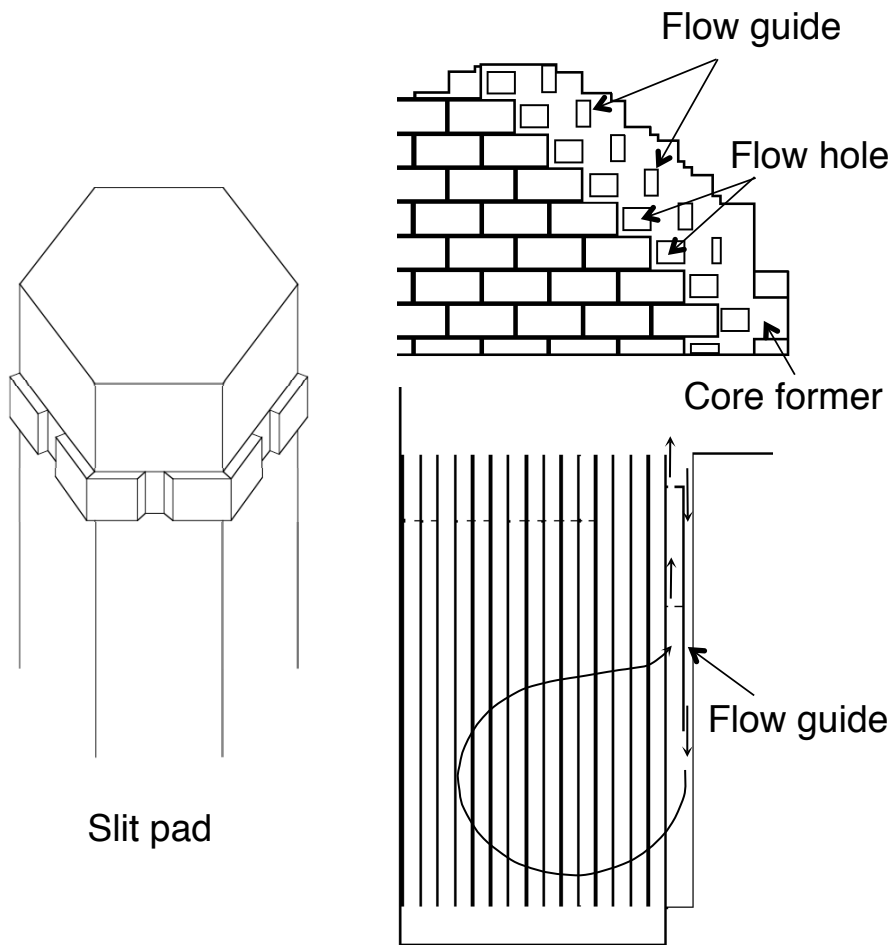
Geometry of Subassembly Pad and Flow Guide
